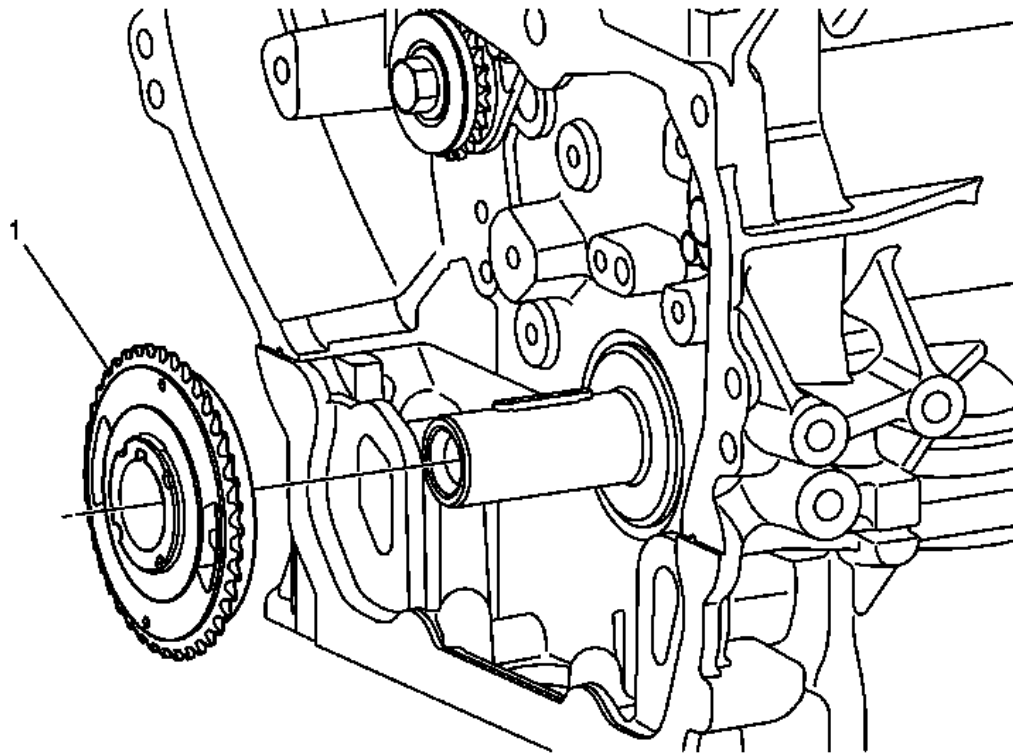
Water Pump and Balance Shaft Chain Crankshaft Sprocket
